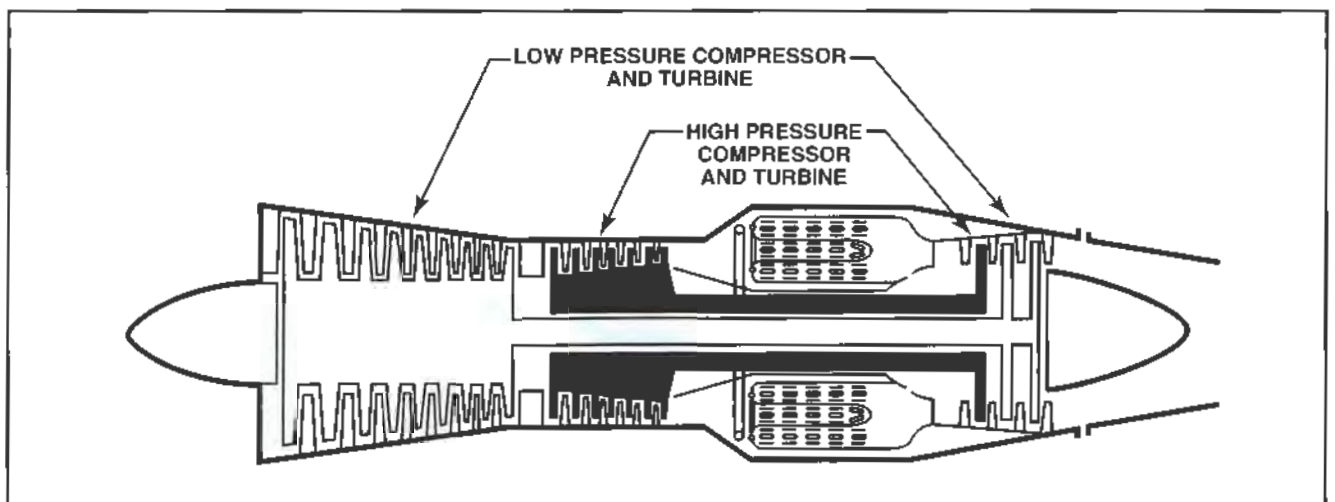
The low-pressure turbine in a dual-spool, axial flow engine drives the low-pressure compressor while the high-pressure turbine drives the high-pressure compressor. By splitting the compressor, two rotating groups, each with considerably less mass than a single-spool compressor, enable the compressors to respond more quickly to power lever inputs and to perform better at high altitudes.
